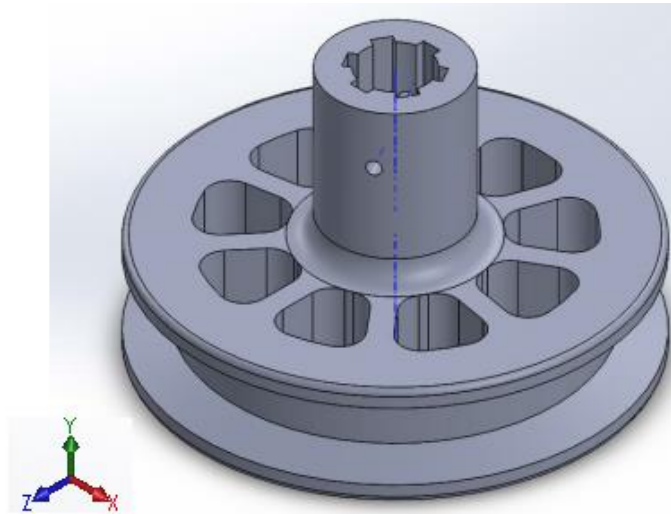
SolidWorks model of drive wheel for friction drive steering system
